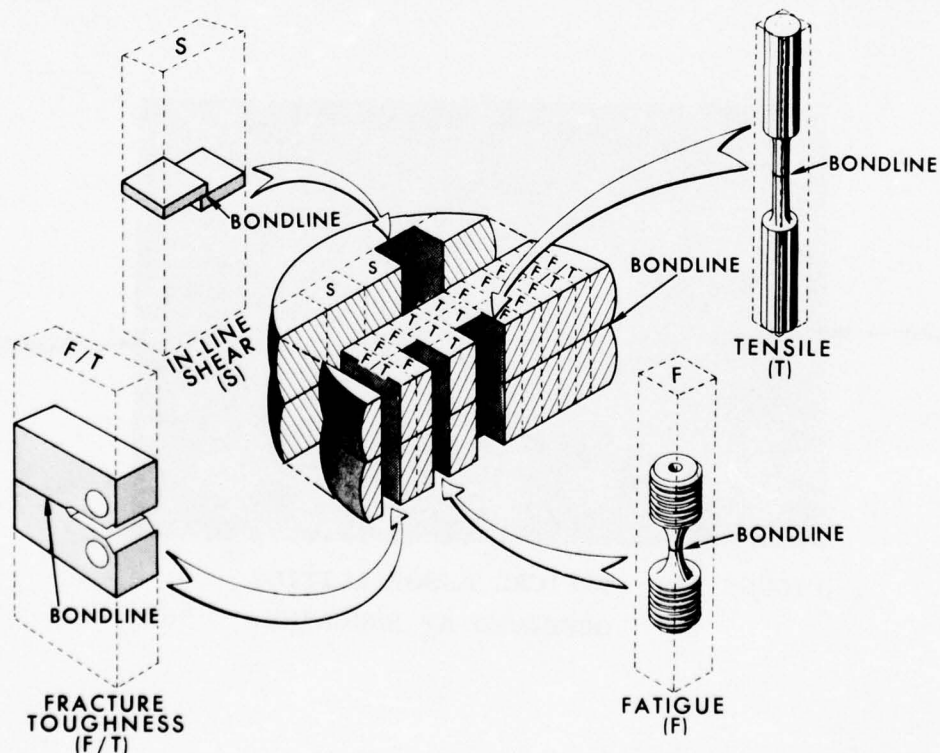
SKETCH OF PANCAKE HALF ILLUSTRATING TYPE AND LOCATION OF TEST SPECIMENS.
